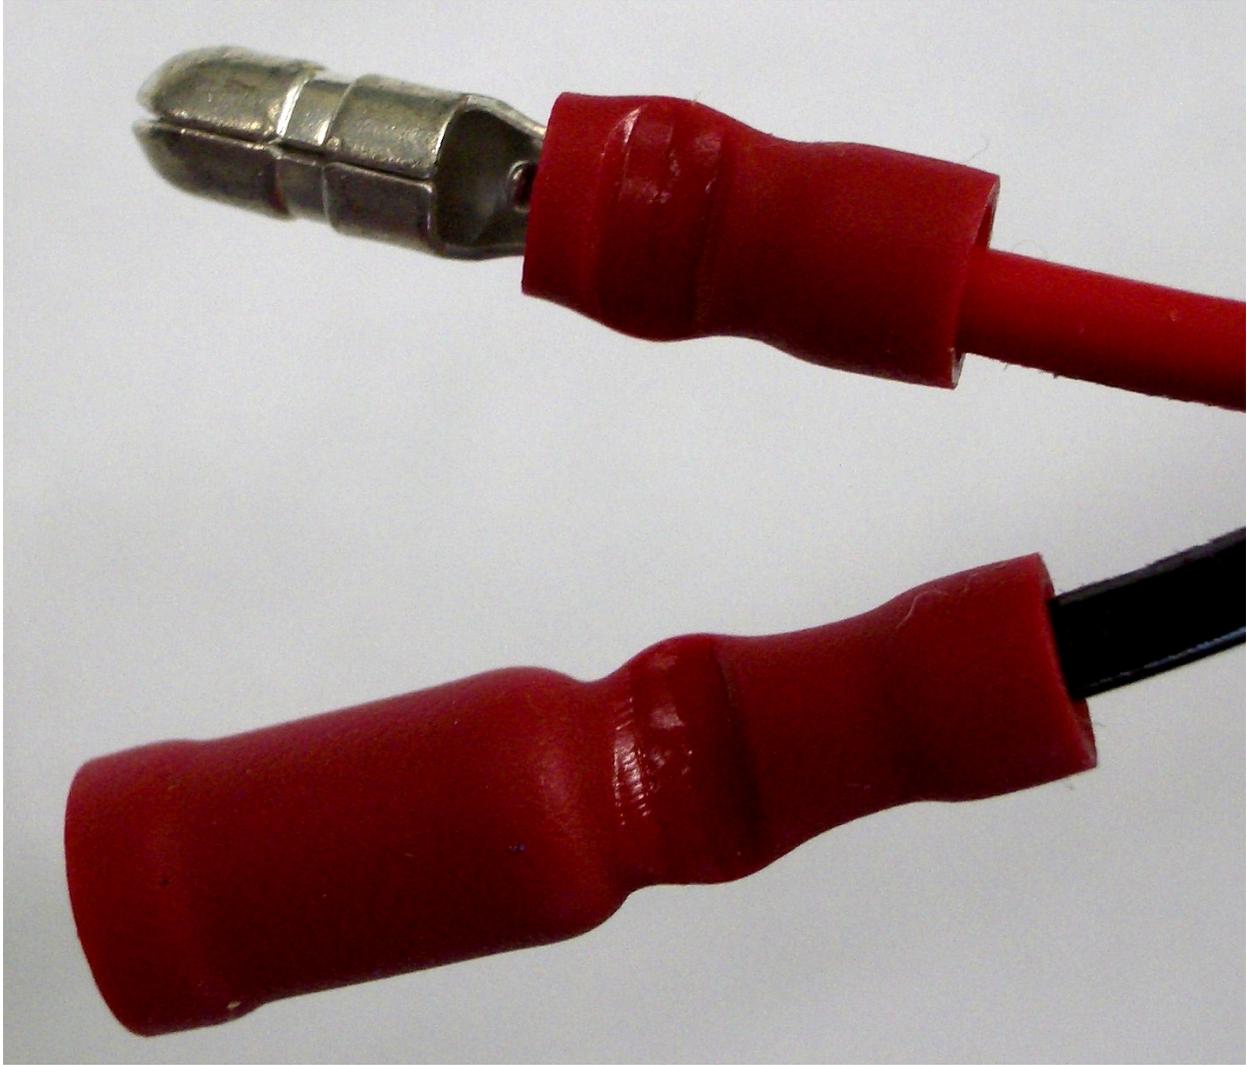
Properly crimped Terminals showing crimp marks in proper crimp zone.
